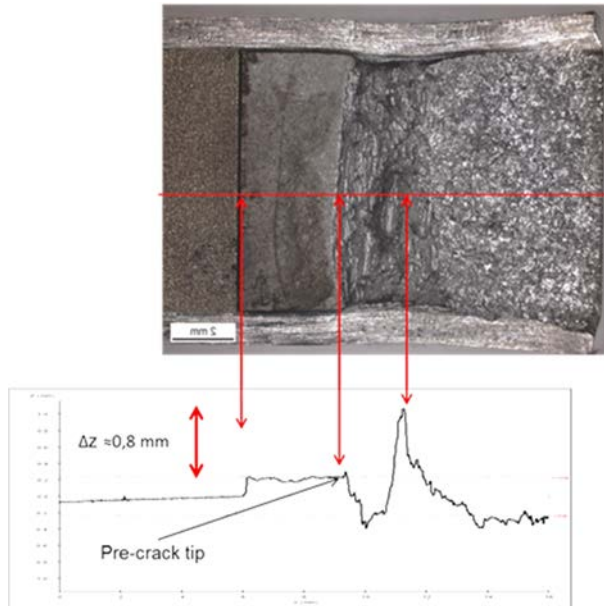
Line profile and fracture surface photograph of miniature sized (5x10x55 mm) SE(B) specimen FLM 2. The starting points of the pre-crack, J-R test and final fatigue are respectively indicated with arrows in the fracture surface photograph. The line profile has been measured from the middle of the fracture surface.
